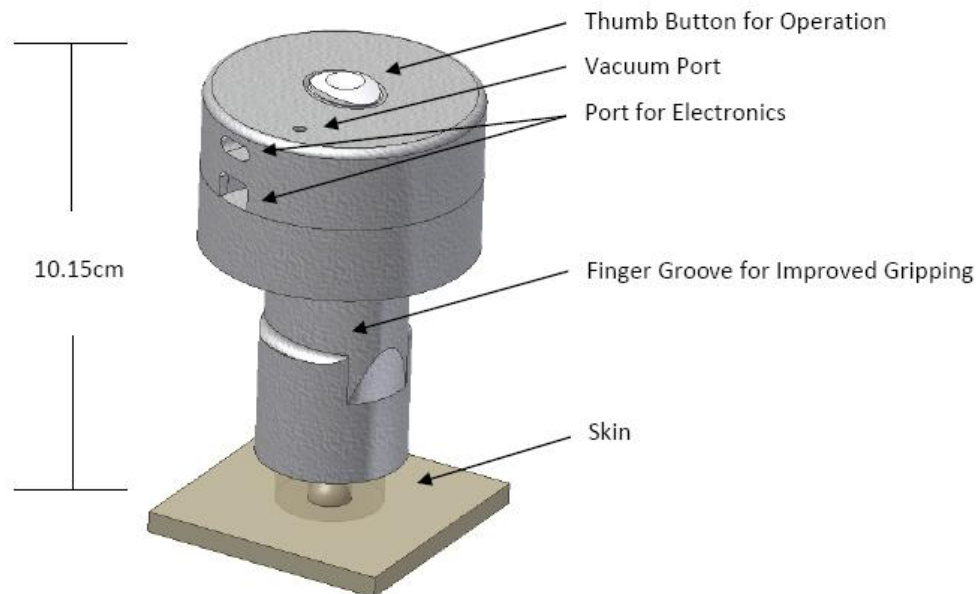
Images of the skin testing probe proposed design. Housed inside the probe is the Sharp GP2D120 IR proximity sensor which will produce an IR beam that will be reflected off of the skin and then received by its CCD linear array IR detector to determine skin deformation.
